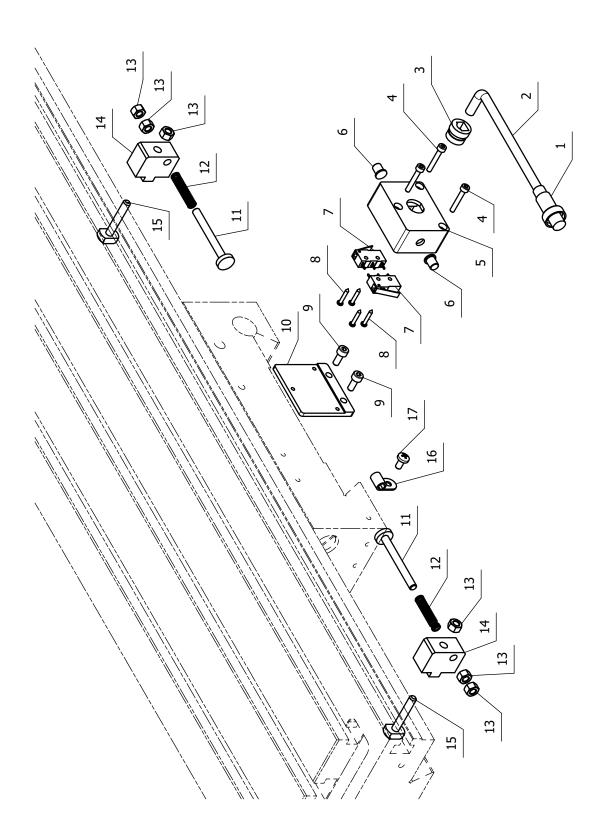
Replacement Parts Illustration for Power Feeder Limit Devices Assembly
